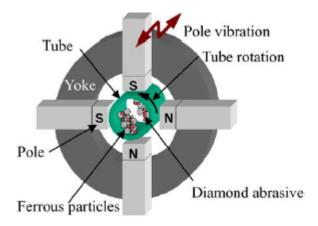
Magnetic field assisted finishing process for alumina ceramic tubes.
